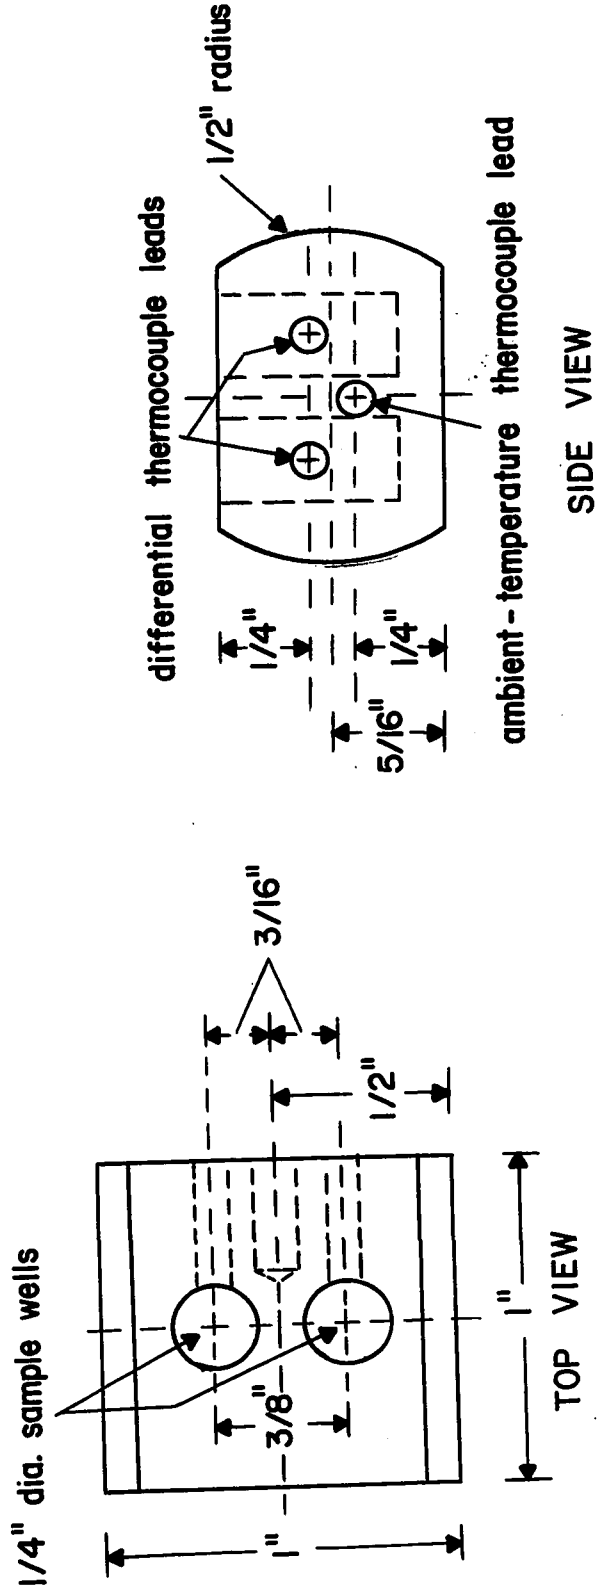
(c) SAMPLE HOLDER ARRANGEMENT
